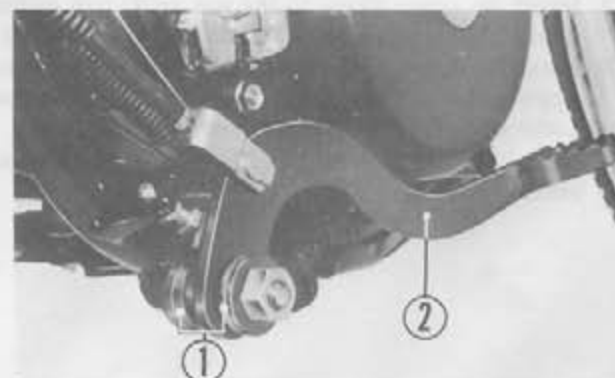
① Pedal shaft seal ② Rear brake pedal
